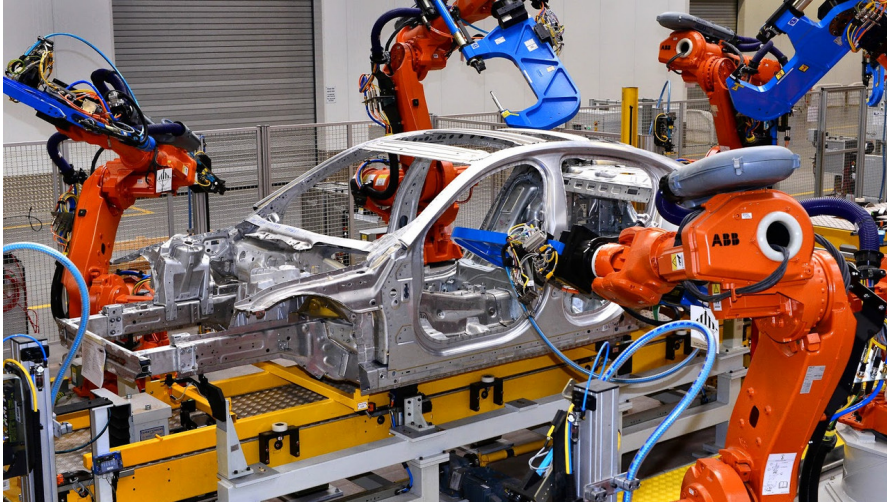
Spot welding robots (in orange) outfitted with a spot-welding gun connects parts by overlapping joint [Dun17]. Some areas are obviously not accessible to the robot.
